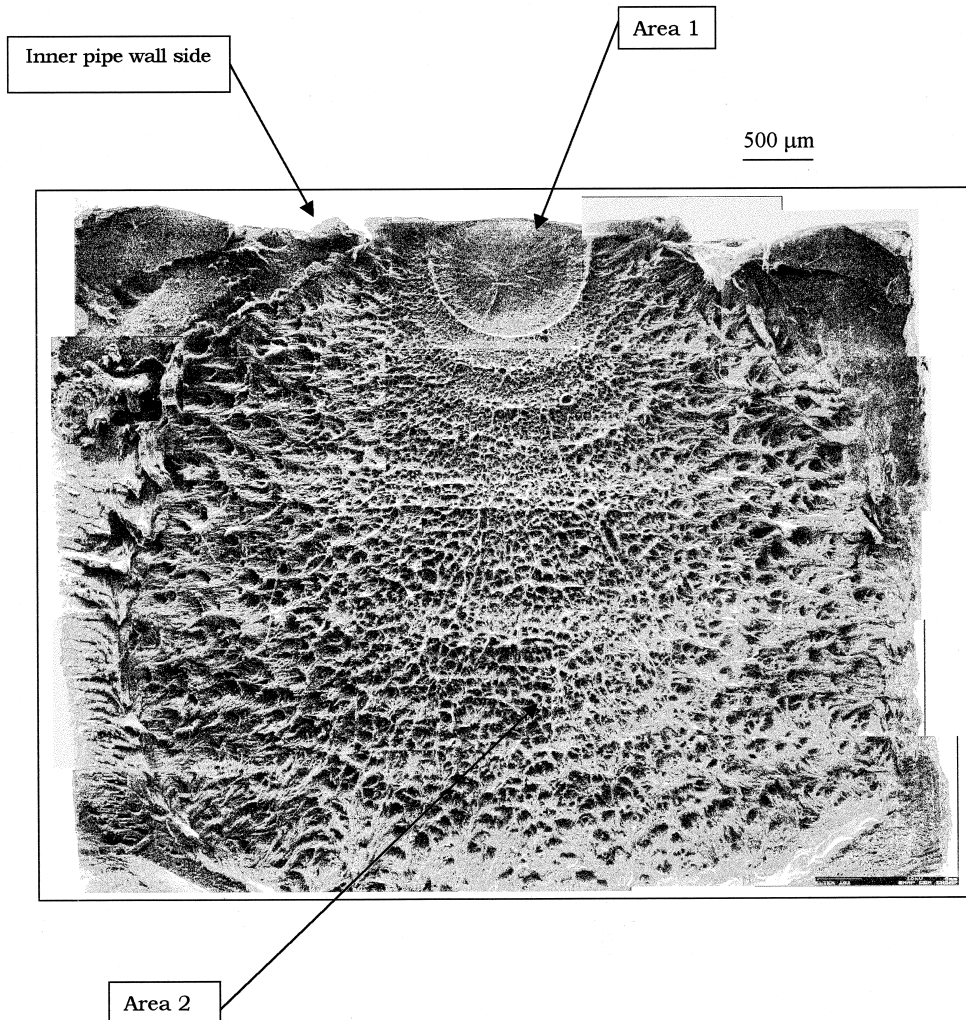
Brittle fracture surface: gas pipe creep failure (9.6 bar) at 80°C (resin B).
